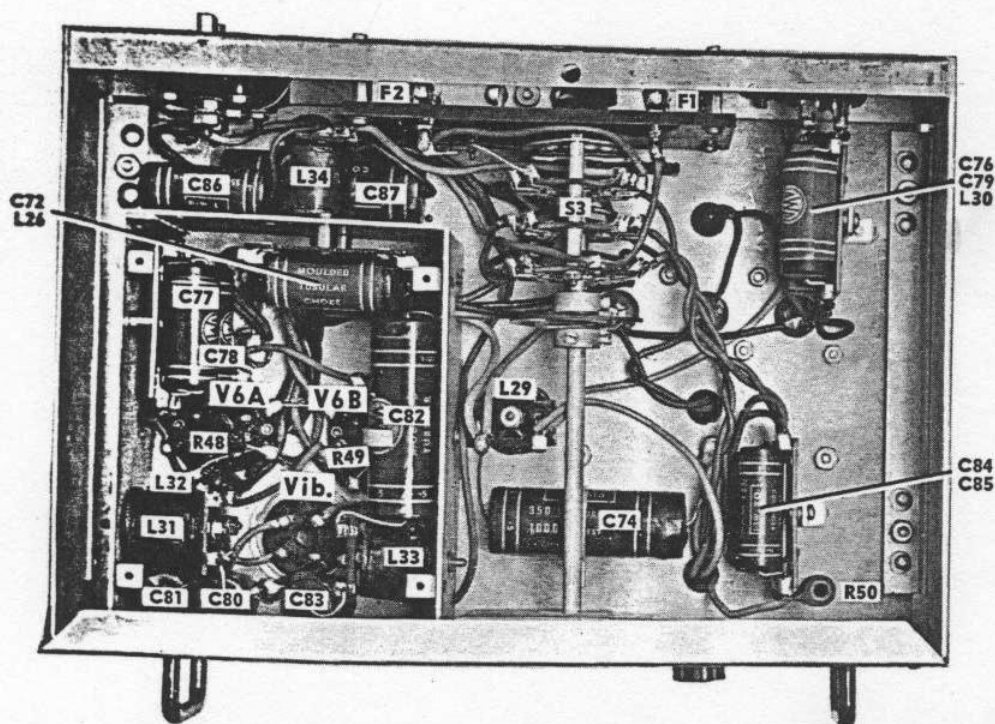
POWER UNIT CHASSIS—UNDERNEATH VIEW.
